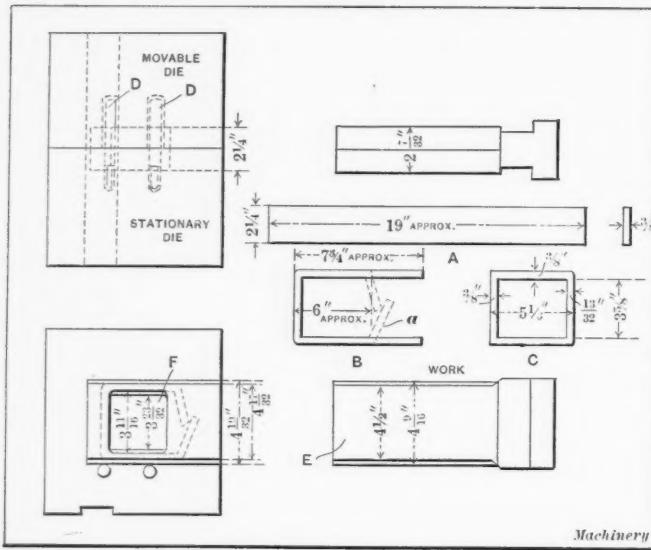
Forging Machine Dies and Tools for making Locomotive Spring Bands
